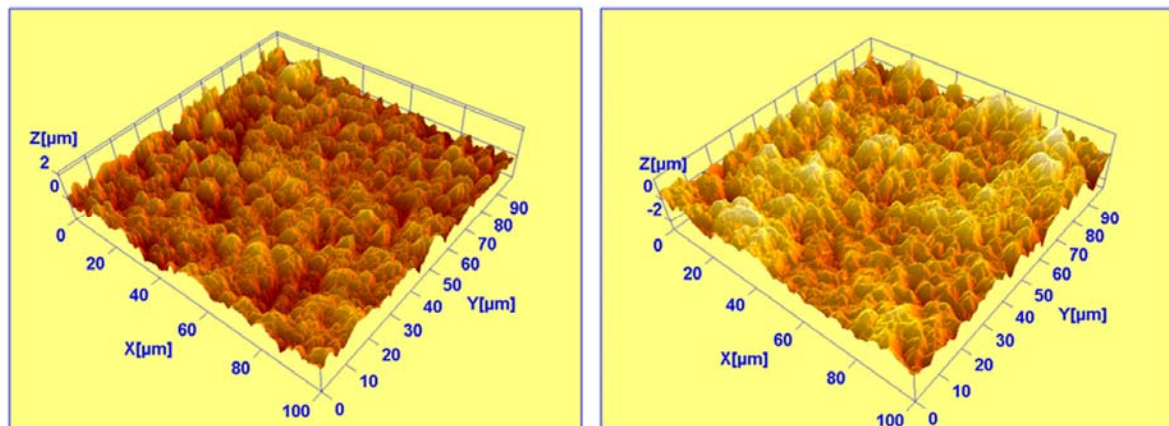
AFM scanning of the μ -EDM-ed Si-wafer surface replicated by electroforming on the tool (left) and by injection moulding on the polymer part (right) [Tosello, 2008(4)].
